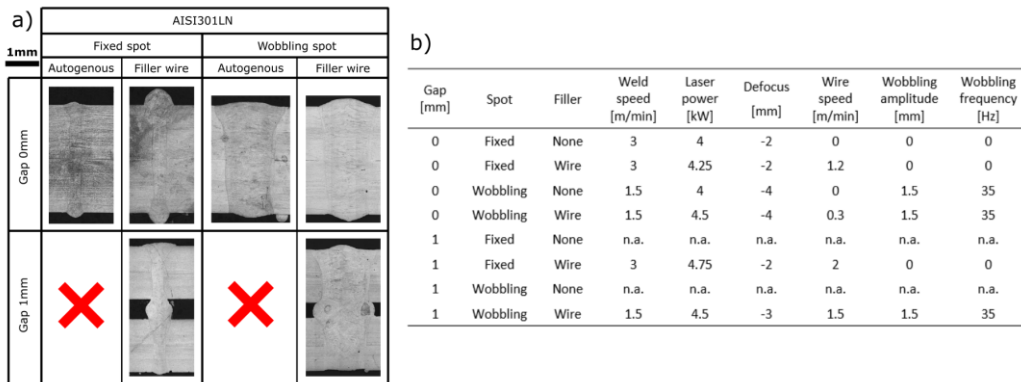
AISI301LN welds: a) sections of samples; b) process parameters Red crosses and ‘n.a.’ refer to failed combinations
